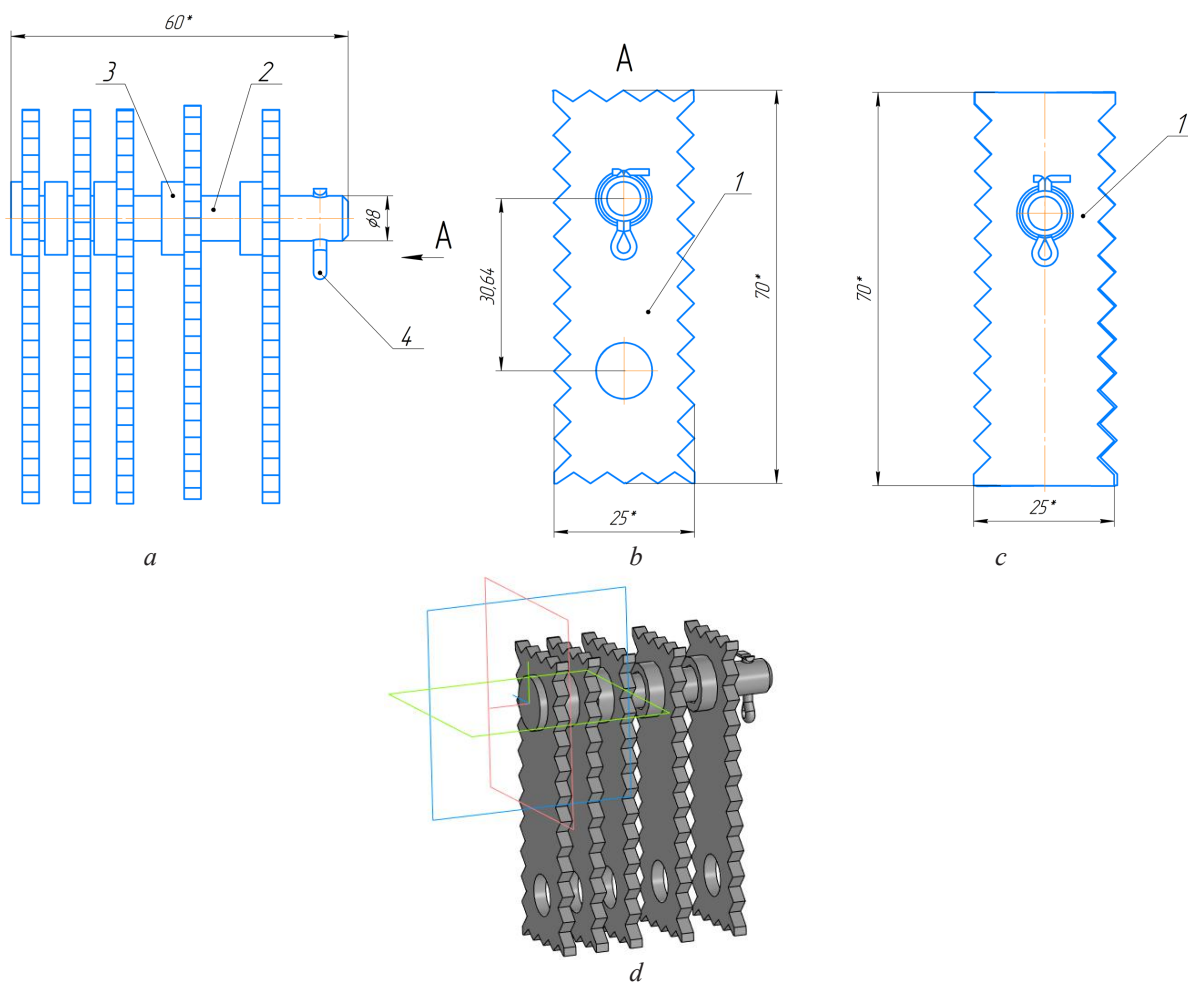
Assembly drawing of a single axle assembly with five hammers [48]:
